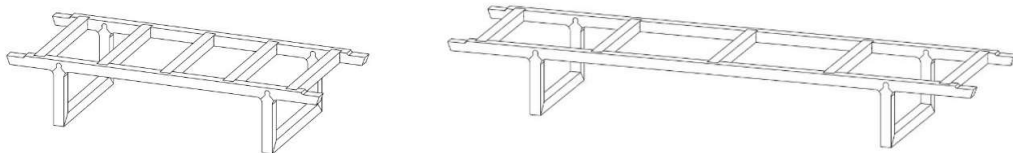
Solid wood frame for the two extreme length dimensions, 2650mm and 1650mm
